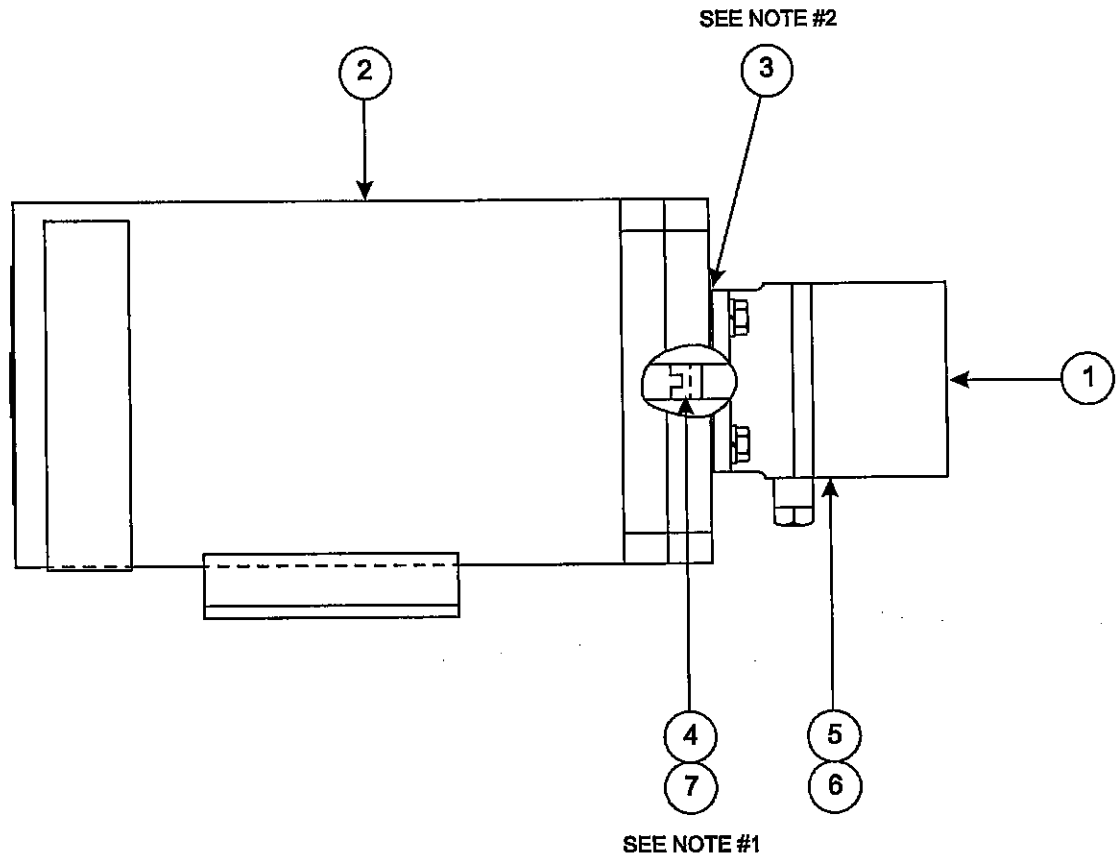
Pump and Motor Assembly, Steering, p/n: 1413444-A
